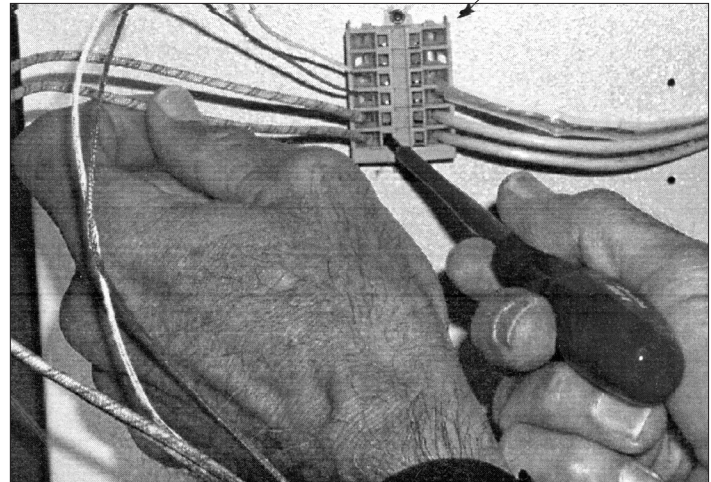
Use an 1/8" flat head screwdriver to remove the heater wires from the Wago Connector
